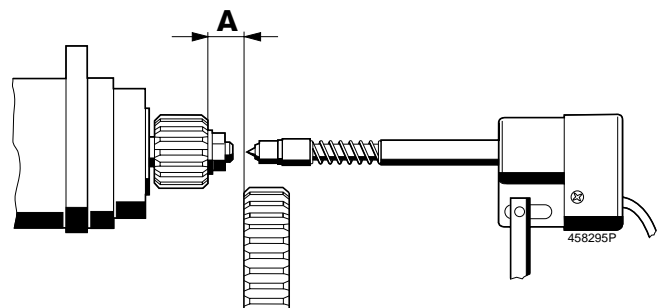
Adjusting the pinion-to-ring gear clearance
